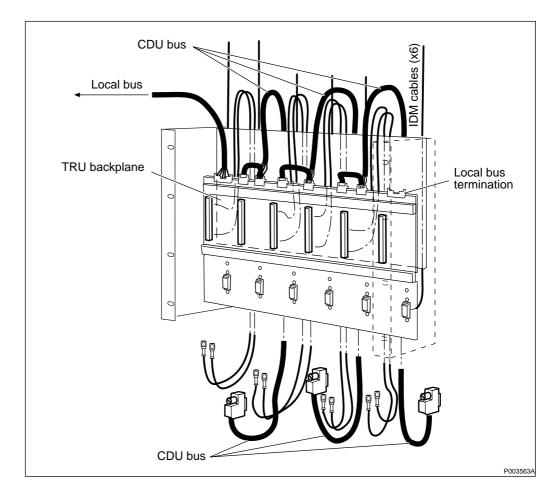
Location of cables inside the TRU sub-rack (viewed from the front)
